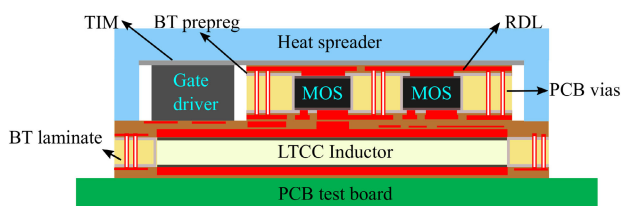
PCB Embedded package with LTCC inductor [91].
